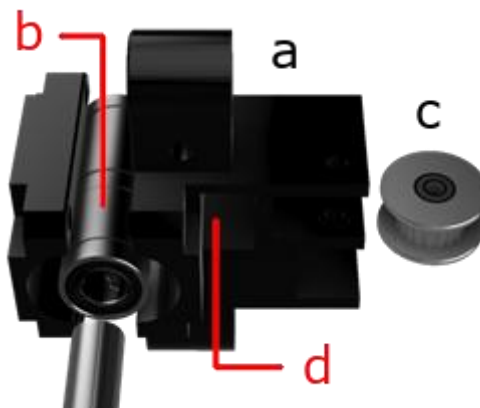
(a) PLA-printed parts joined with screws to secure a (b) LM8LUU linear bearing, which enables sliding along an (c) 8 mm diameter aluminum rod. (d) Toothed tensioner pulley with a ball bearing, mounted on the carriage.
